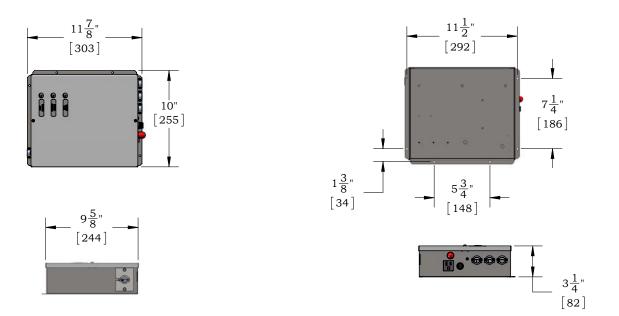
RP620* Control Box Dimensions (Tolerance ± 1/8") [mm]
